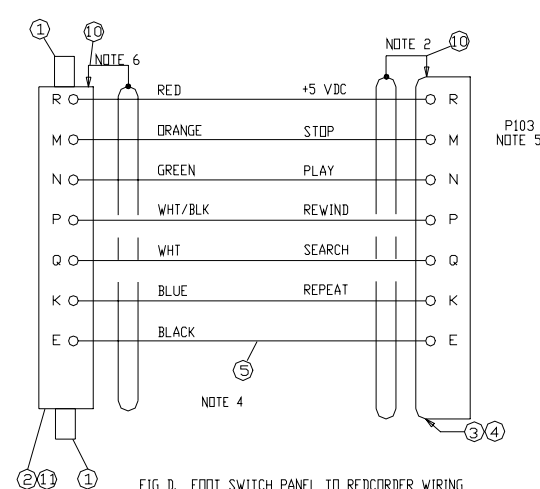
FIG D. FOOT SWITCH PANEL TO REDRECORDER WIRING
